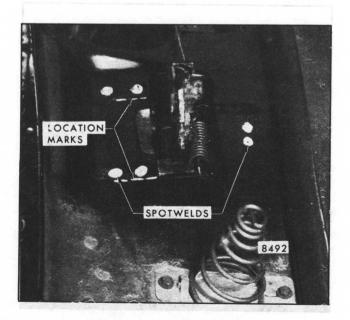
Hood Latch Assembly - "H-11, 15 and 77"
